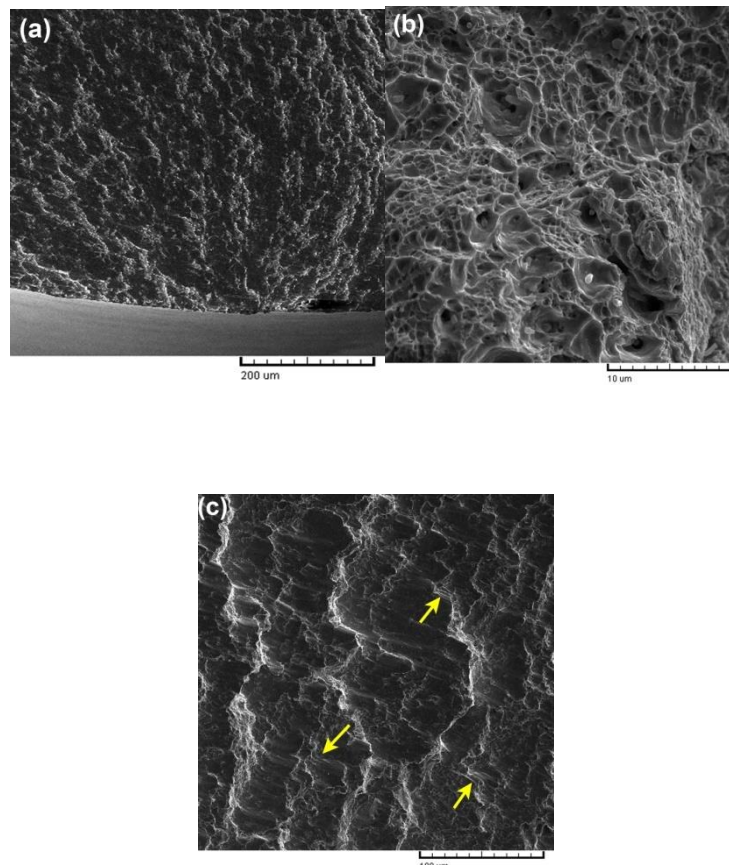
SEM micrographs of room temperature fatigue fracture surface of the specimen austenitized at 950 °C for an hour, air cooled and finally aged at 600 °C for 1.5 ha) Crack initiation in the surface; b) Ductile fracture mechanism of microvoid coalescence and growth; c) Striation-like features
